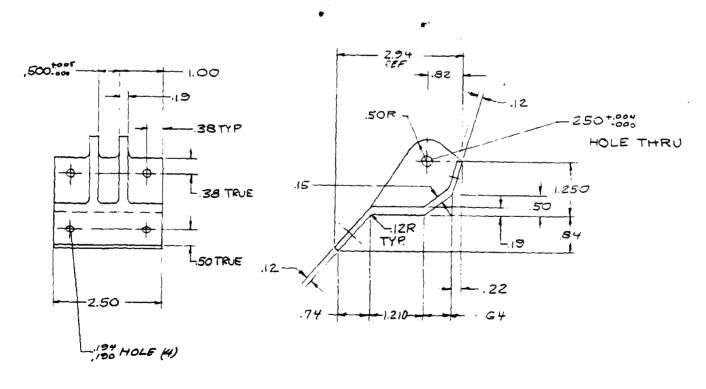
Main Landing Gear Door Aft Latch Bracket
